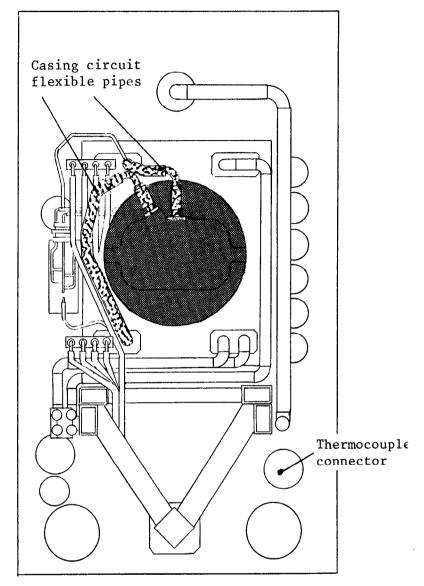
Section through target reflector assembly showing connections for casing circuit.
